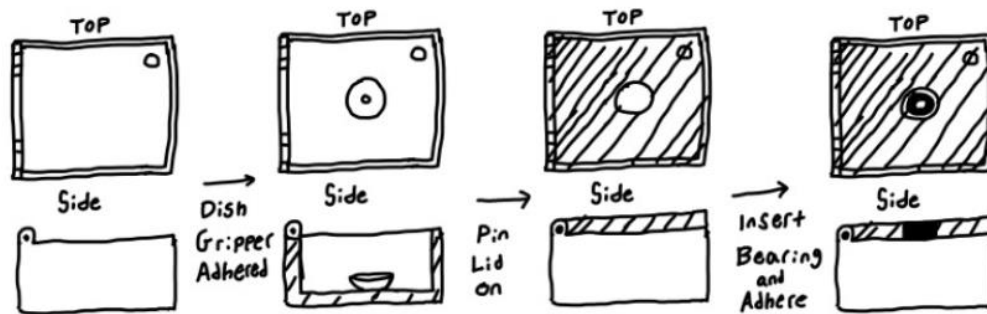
First Assembly Steps (Frame, Dish Gripper, Lid, Bearing)
